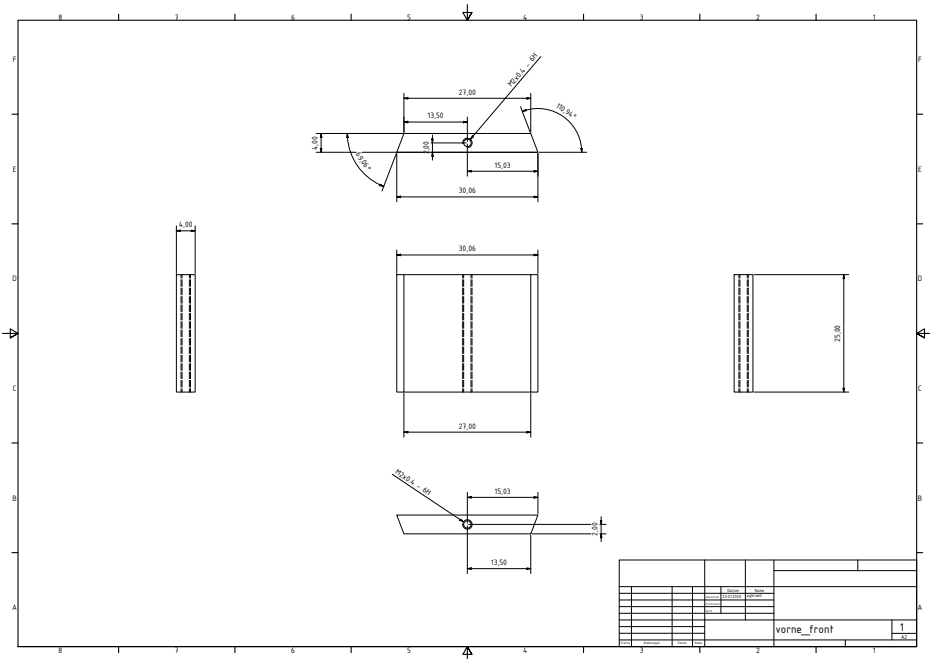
Technical drawing of the front plate of a box from the front part of the pair spectrometer.
